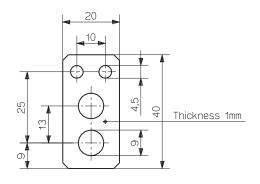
Mounting plate (Art. No. 3.520.1015)
